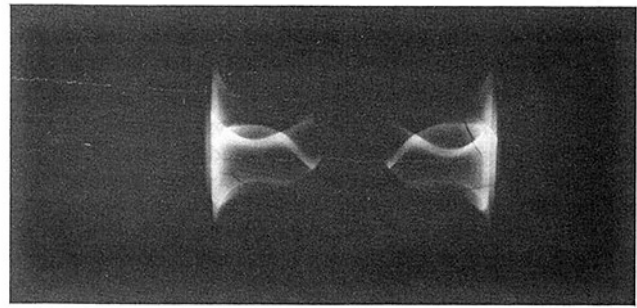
Cracks in the hub and blade of rotors after baking in the injection-molded silicon carbide rotors
